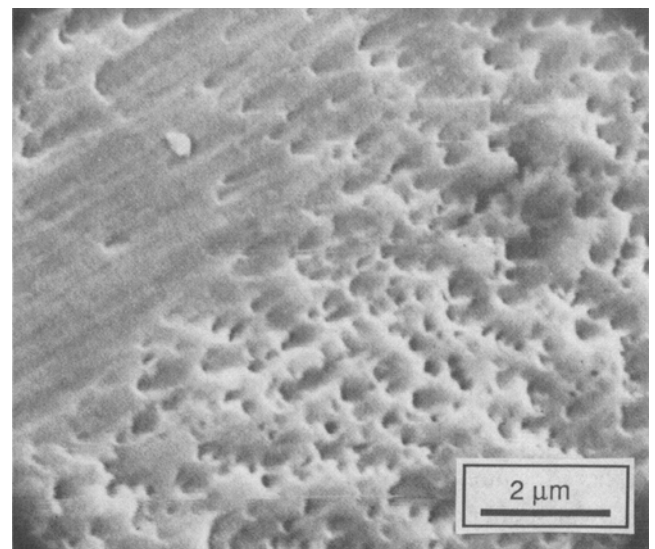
Fractograph of a torsional shear specimen (AM 4340 steel at Rc 56) tested to failure, illustrates microvoid sheet type fracture mechanism.
